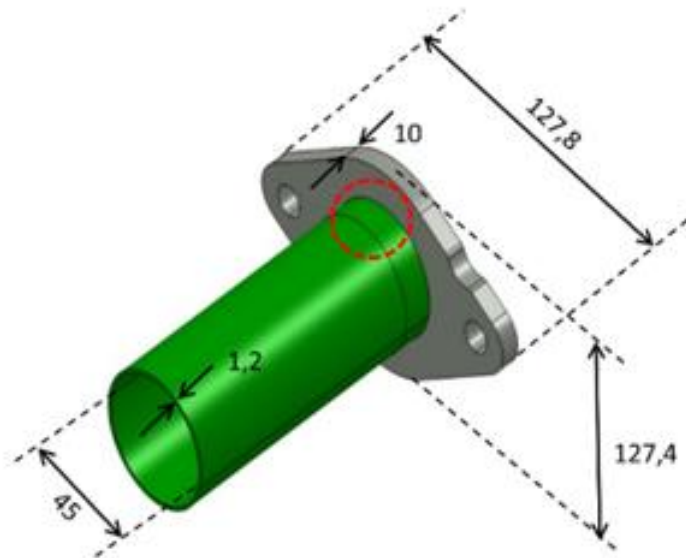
Schematic drawing (dimensions in mm) of the test piece used in this study.
